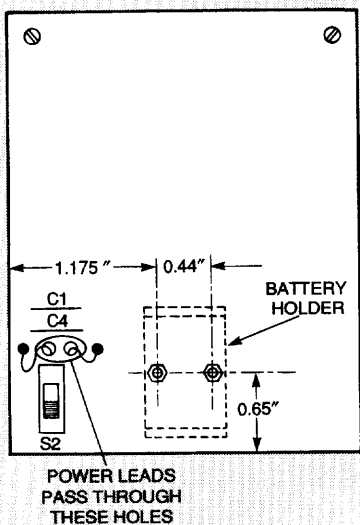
DRILLING GUIDE. Four No. 2 screws and nuts hold the plastic backplate and battery holder in place.
